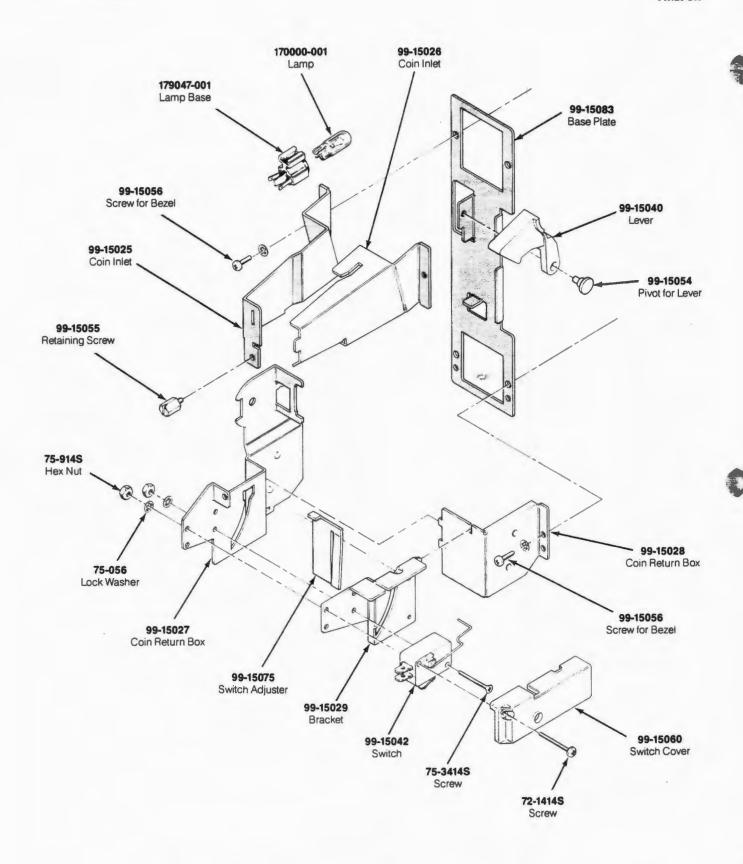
Coin Controls, Inc. Coin Door Assembly 171034-xxx A
